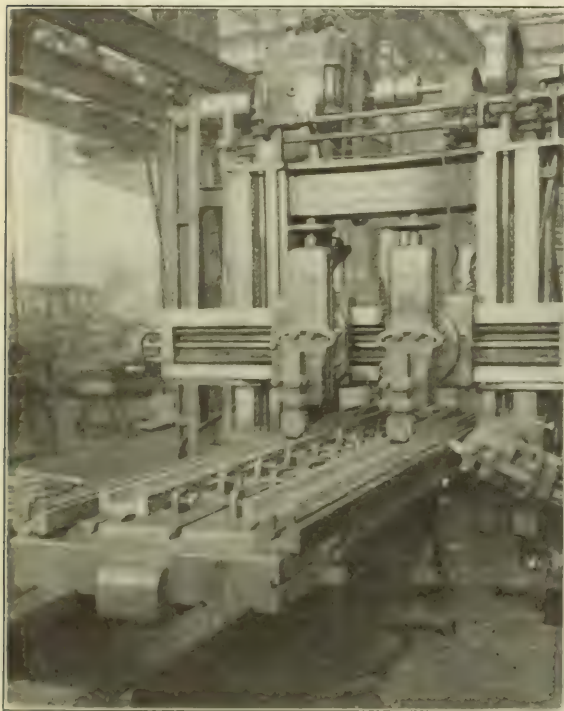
Planing the Inner Sides of Flanges and Face of Shoes and Wedges.
